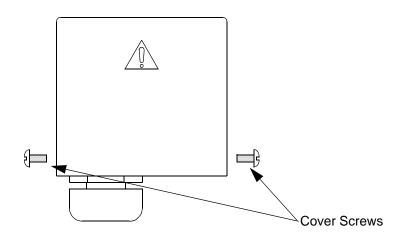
Electrical Terminal Enclosure with Cover in Place
